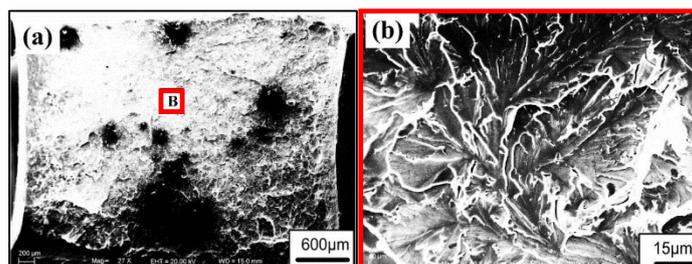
Brittle failure, fusion zone on FB welding
